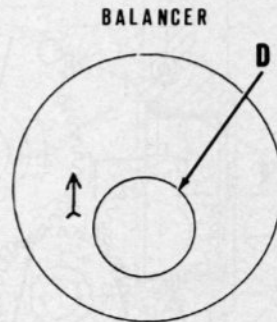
Arrow on piston crown should point towards injection pump and depression (D) should be near injectors.
